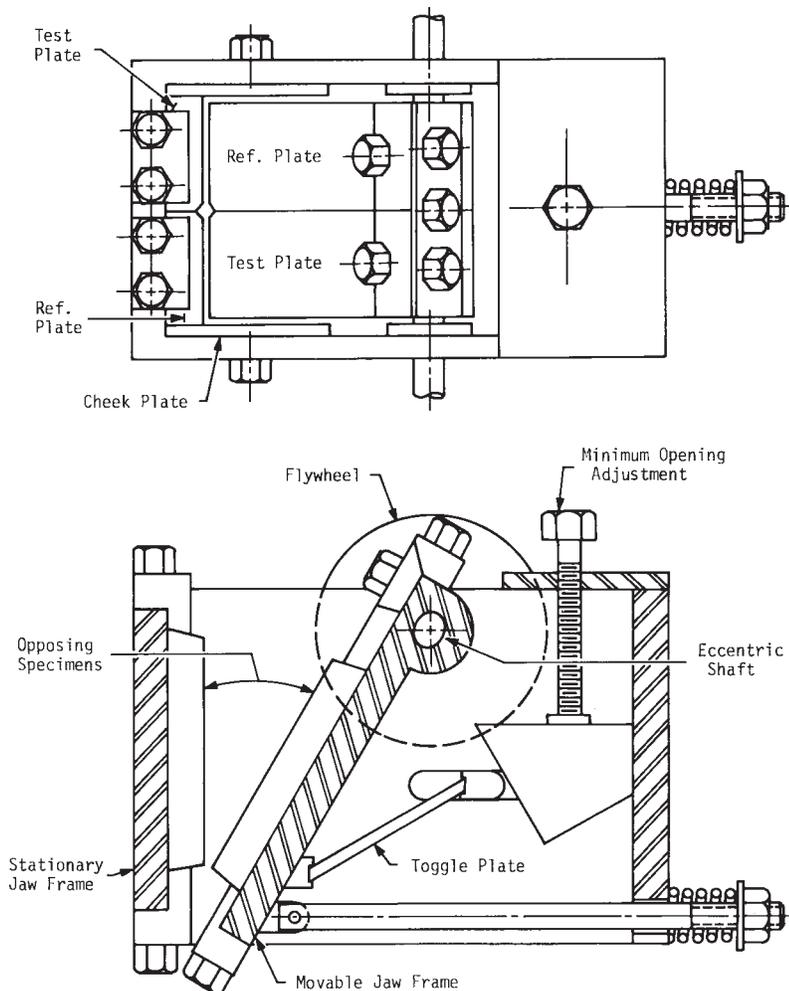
Typical Jaw Crusher Construction and Layout of the Test Plates
